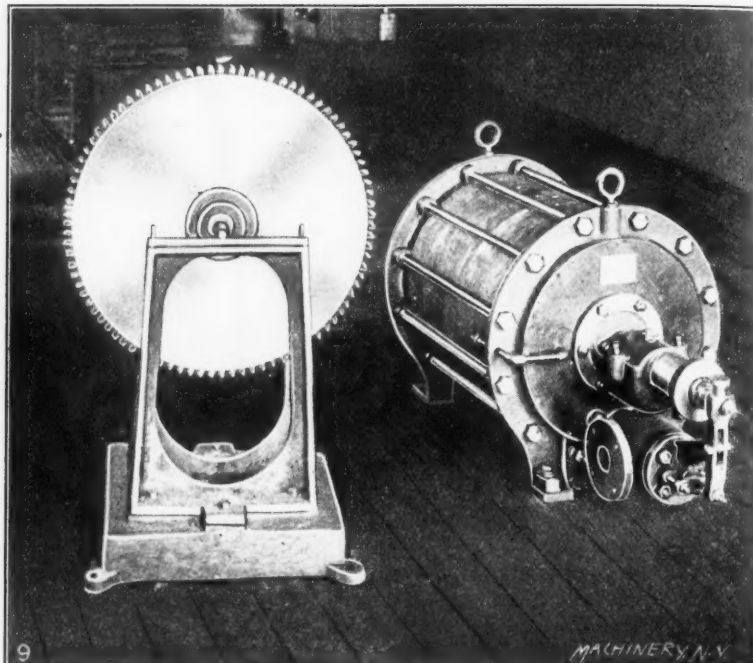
Balancing Disk on Knife-edge Bearing Ways.
